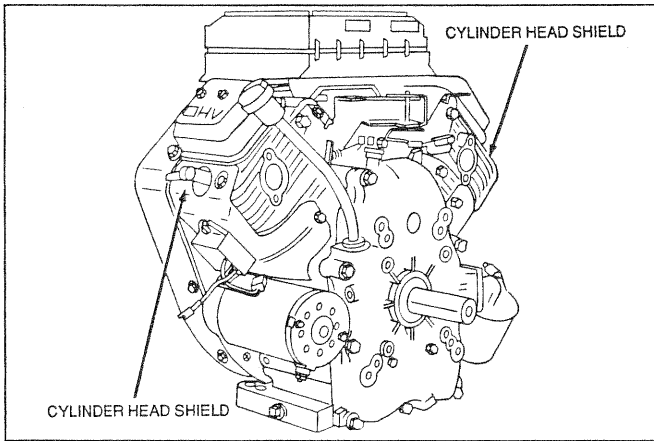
Cylinder Ducting- Horizontal Shaft Units
